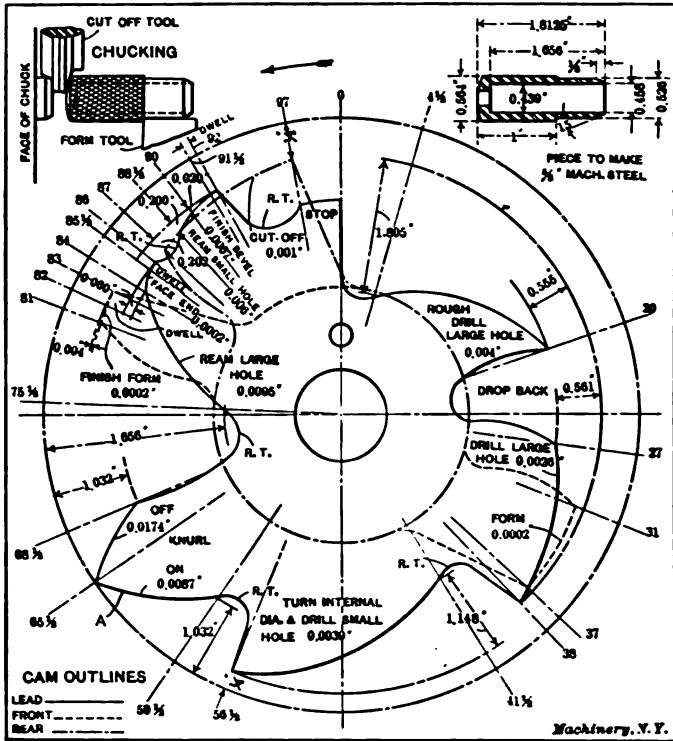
Cam for Making Brown & Sharpe Micrometer Sleeve, showing Method of Laying out Lobe for Turret Knurling
